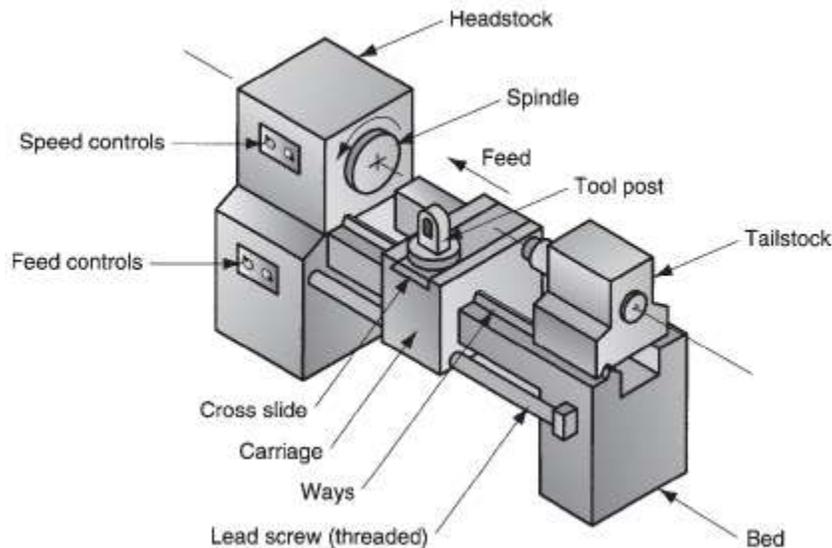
Diagram of an engine lathe, indicating its principal components.
